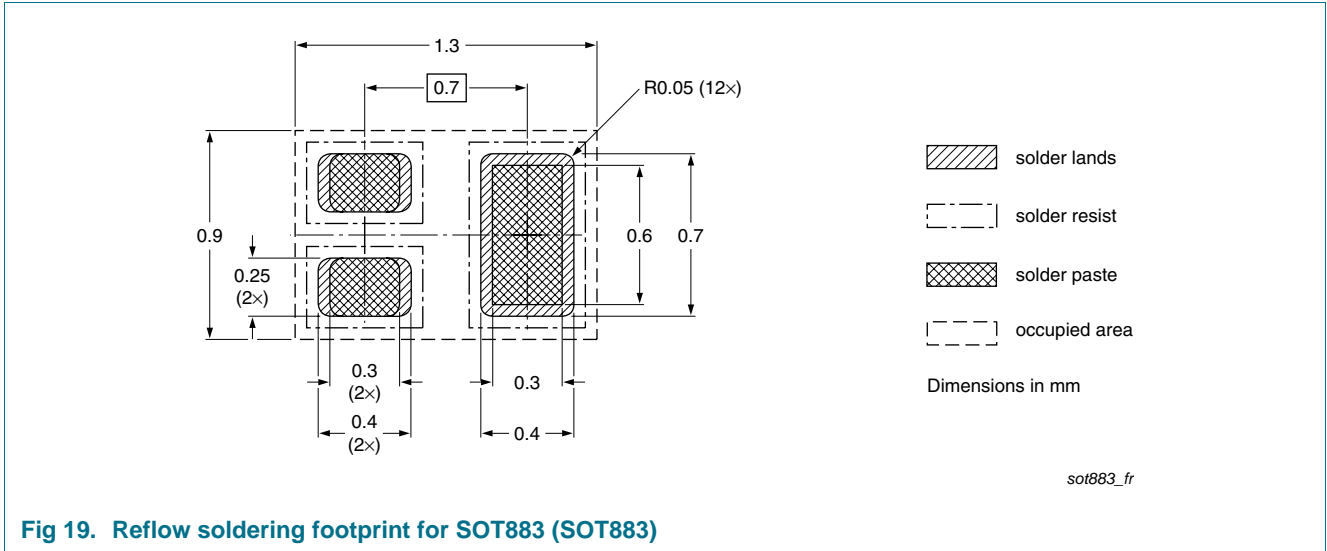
Reflow soldering footprint for SOT883 (SOT883)
